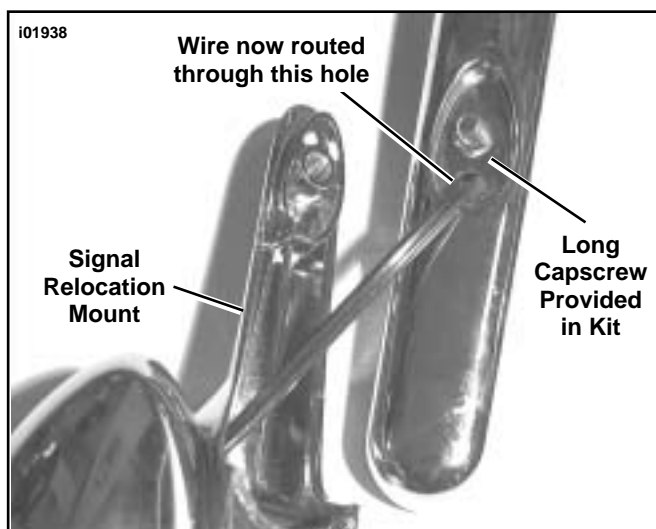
Route Wiring and install Signal Relocation Mount to Fender Support
